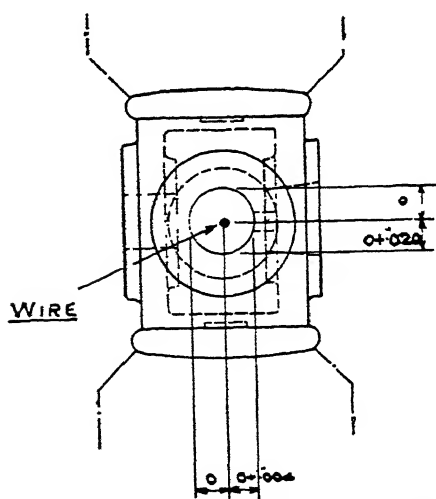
POINT B—TAKEN IN PISTON-ROD BOSS OF CROSSHEAD AT FRONT END OF GUIDE
